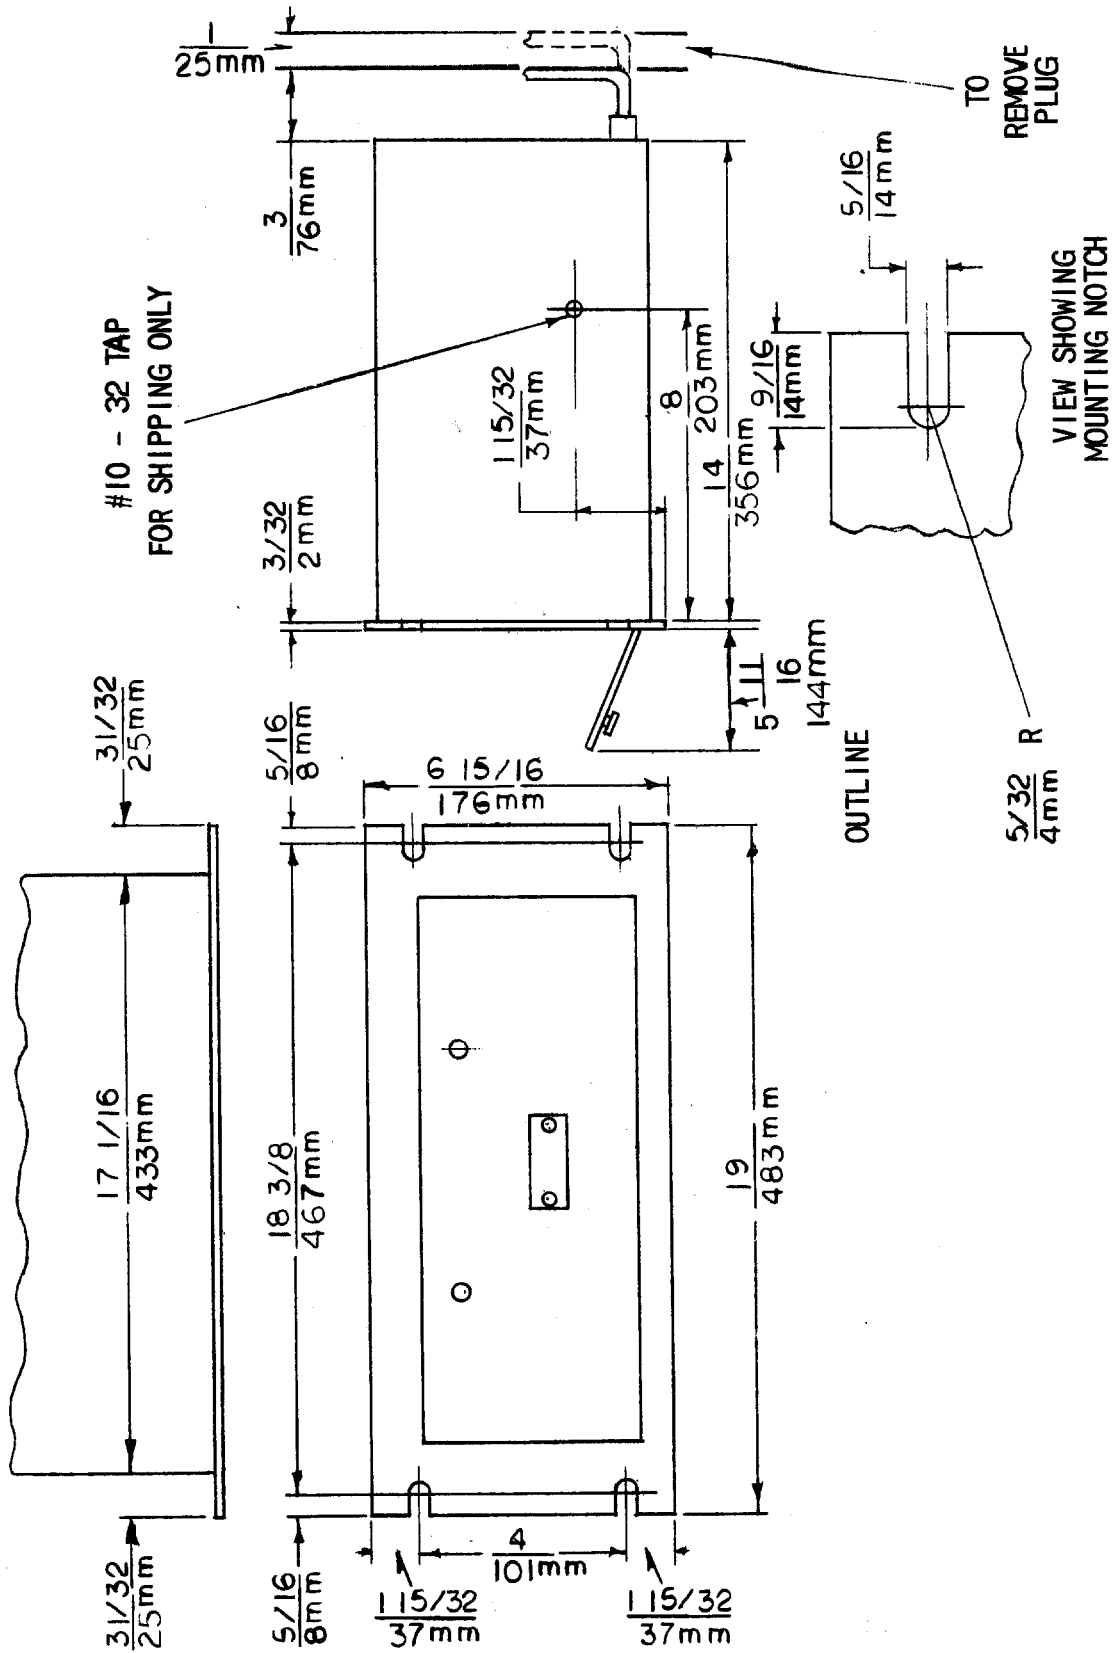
(0227A2037-1) Outline and Mounting Dimensions for the SLAT54K Relay
